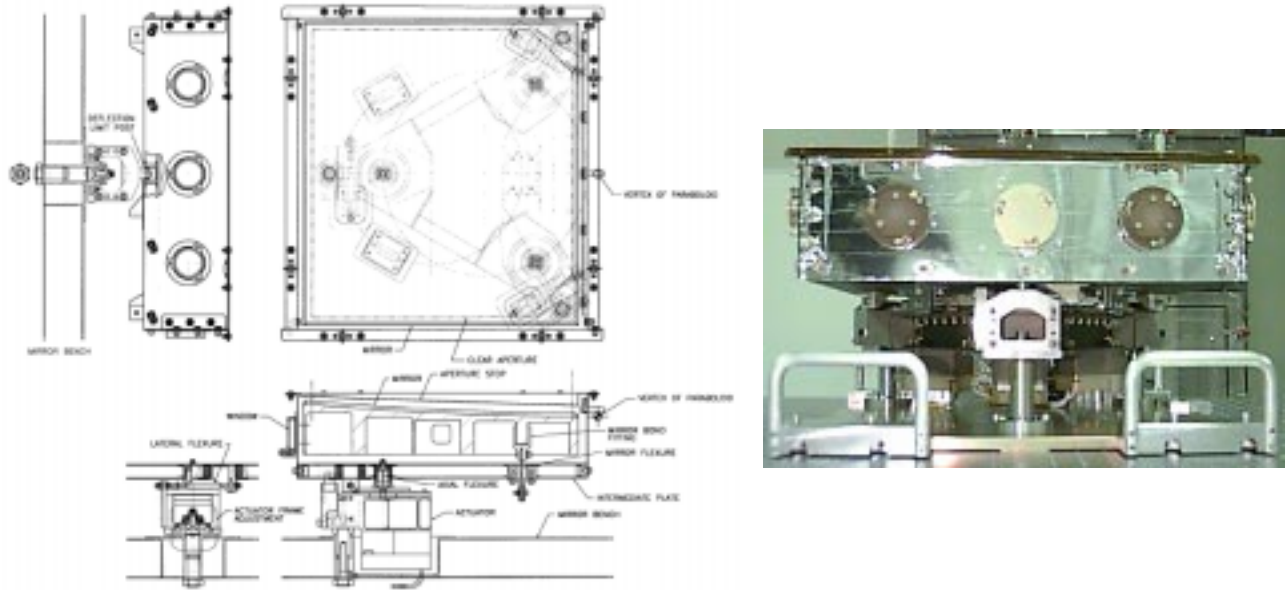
(a) Mirror assembly configuration. (b) Photograph showing anti-vertex side of completed FUSE mirror assembly mounted for transport on handling plate.
